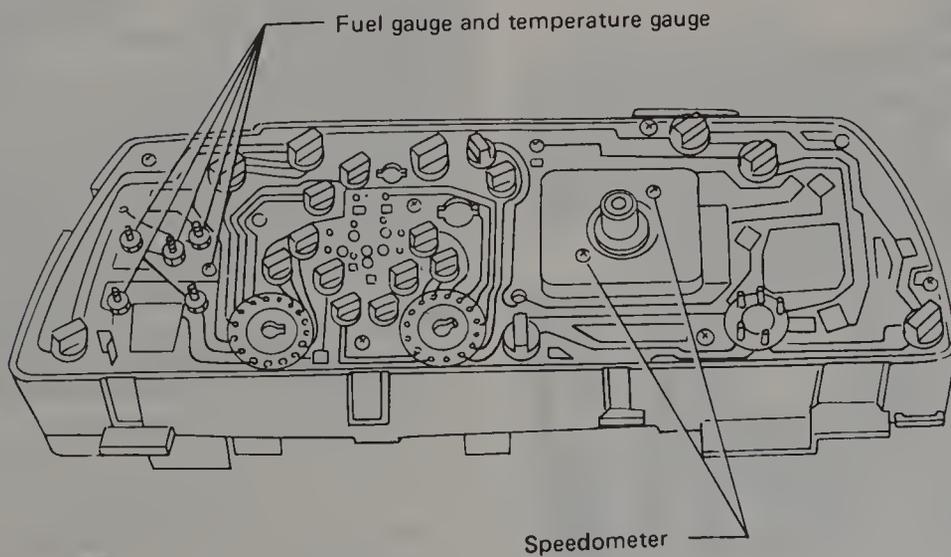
DL model gauge mounting positions and hardware (Sec 6)
